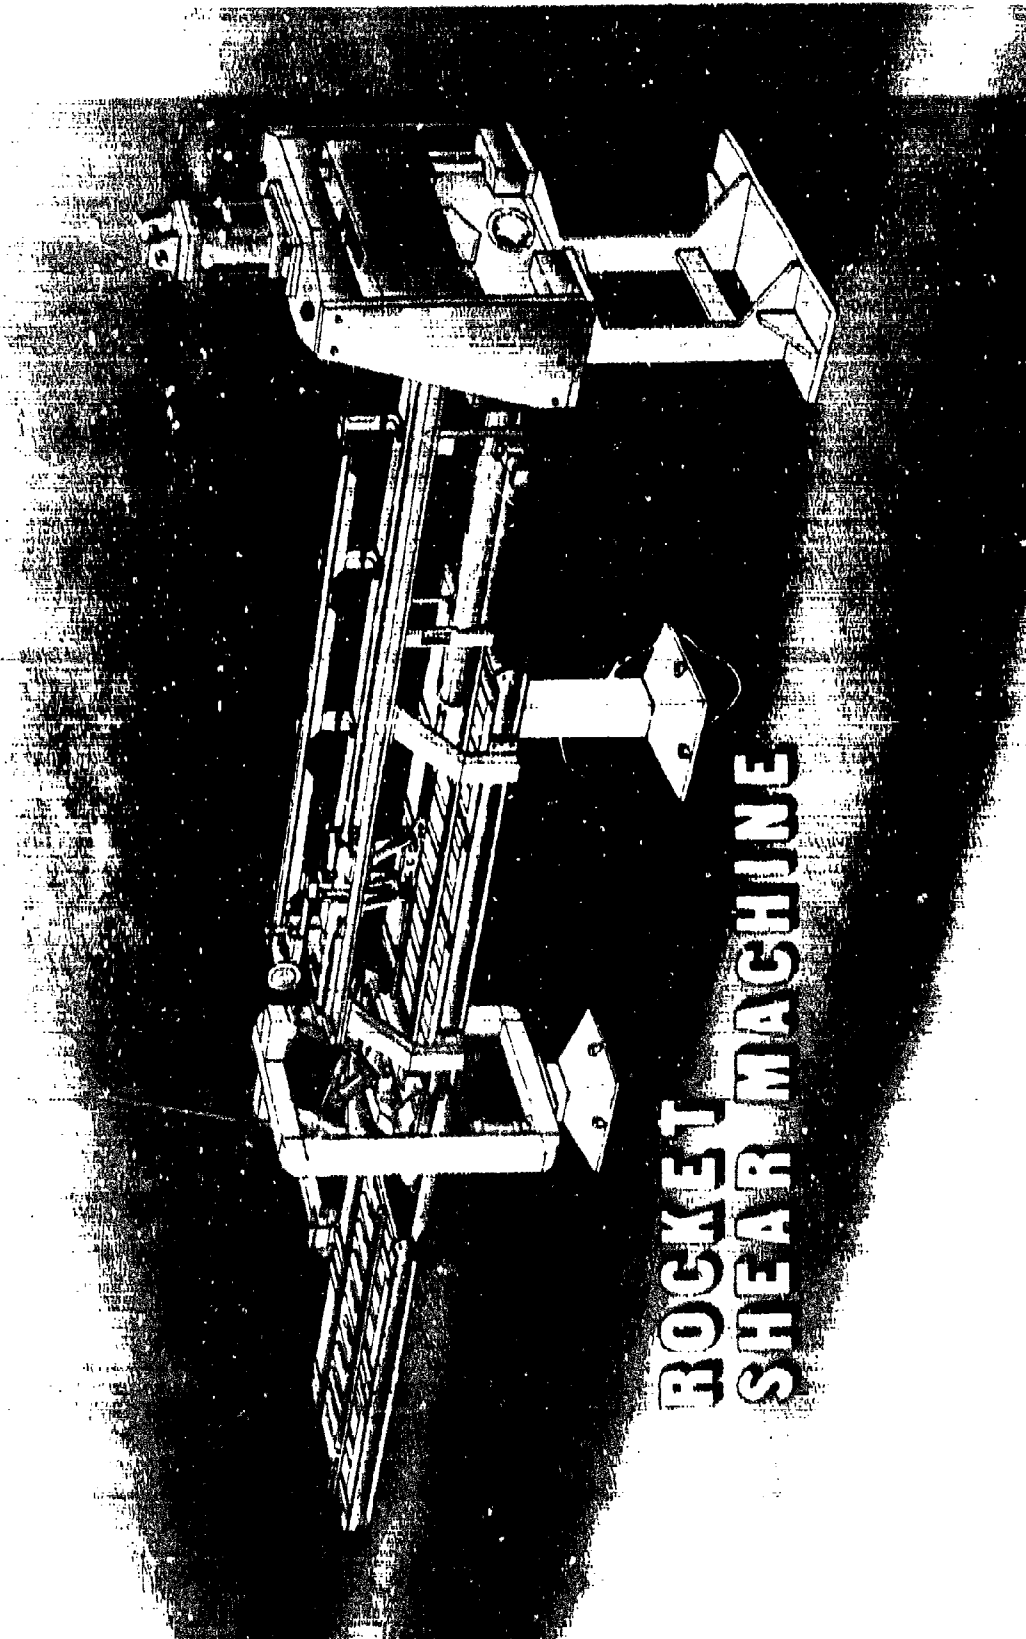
Rocket Shear Machine/Rocket Drain Station
